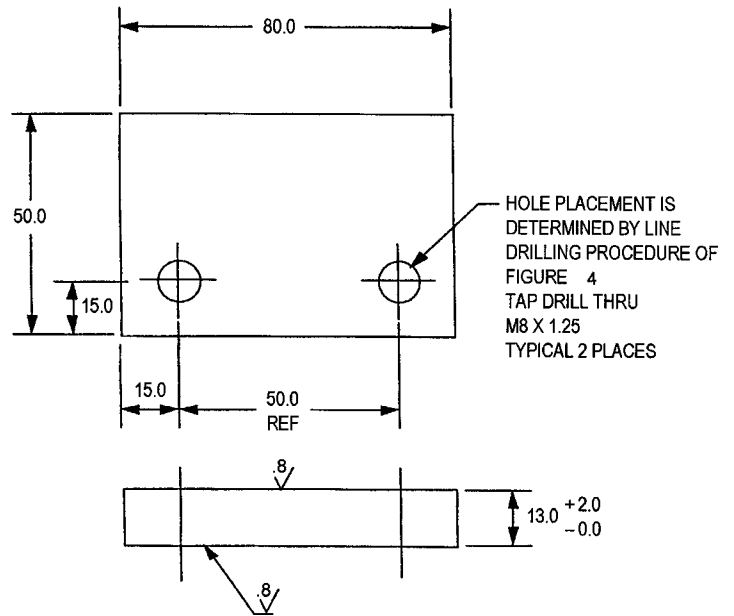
Support Fixture—Support Plate Details (SI Version)
